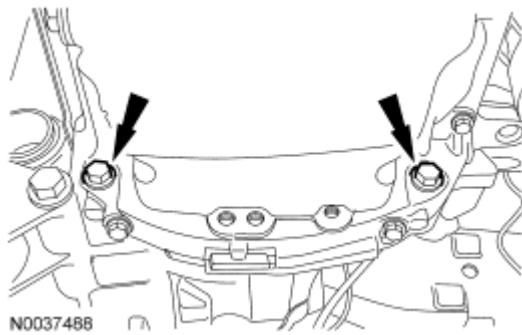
Locating Oil Pan-To-Bellhousing Bolts
